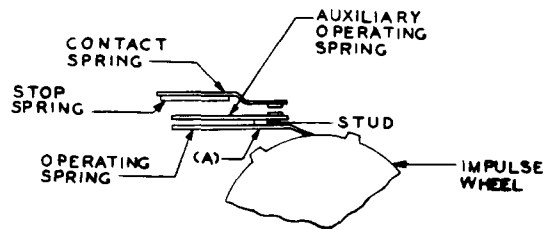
Spring Tension - Keys Equipped With Auxiliary Operating Spring
